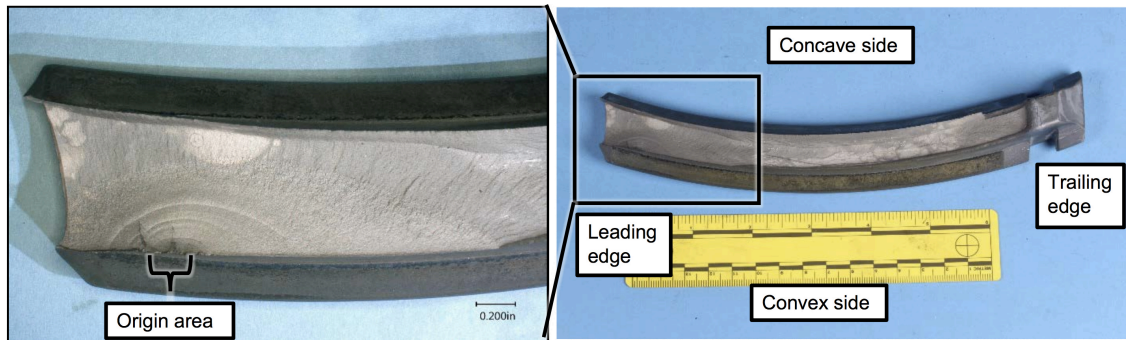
Surface fracture of the turbine blade fatigue failure of Southwest Airlines Flight 1380 with fatigue indications, taken from [Boa18].
